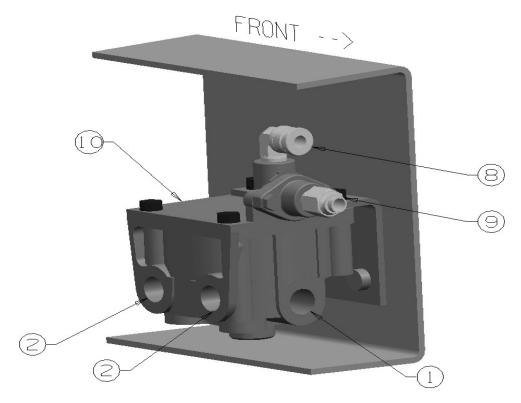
Kit 8900084R91 (Valve Kit) Contains a New Relay Valve with an Internal Double Check Valve
